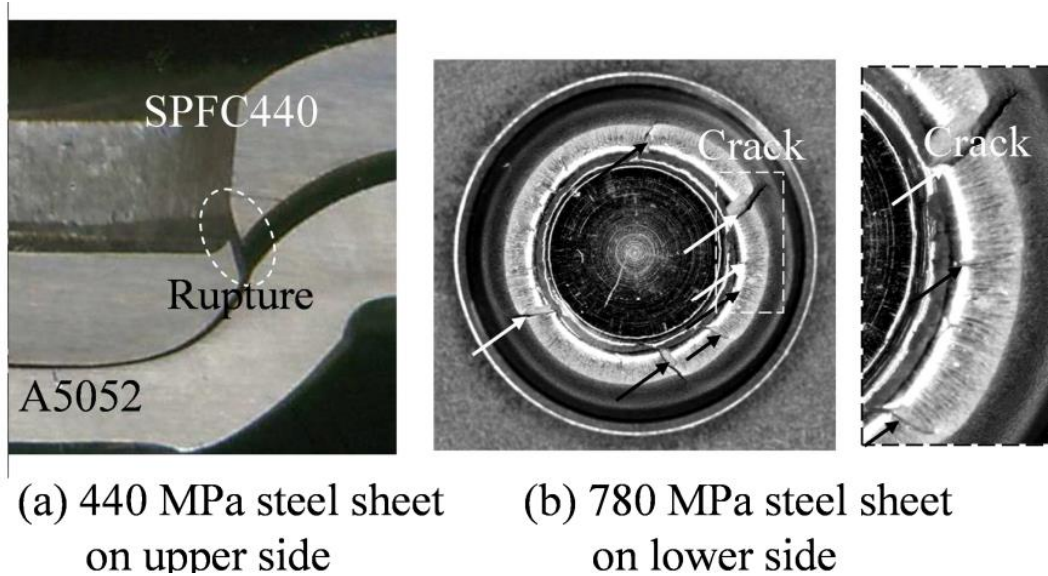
Fractures in steel sheets with conventional die and clinching [41]
